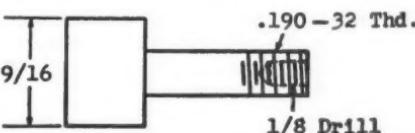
Drawing of Typical Screw Machine Product. Selection of the Machine to be Used will be Based upon the Surface Speed to be Used on the Largest Diameter
